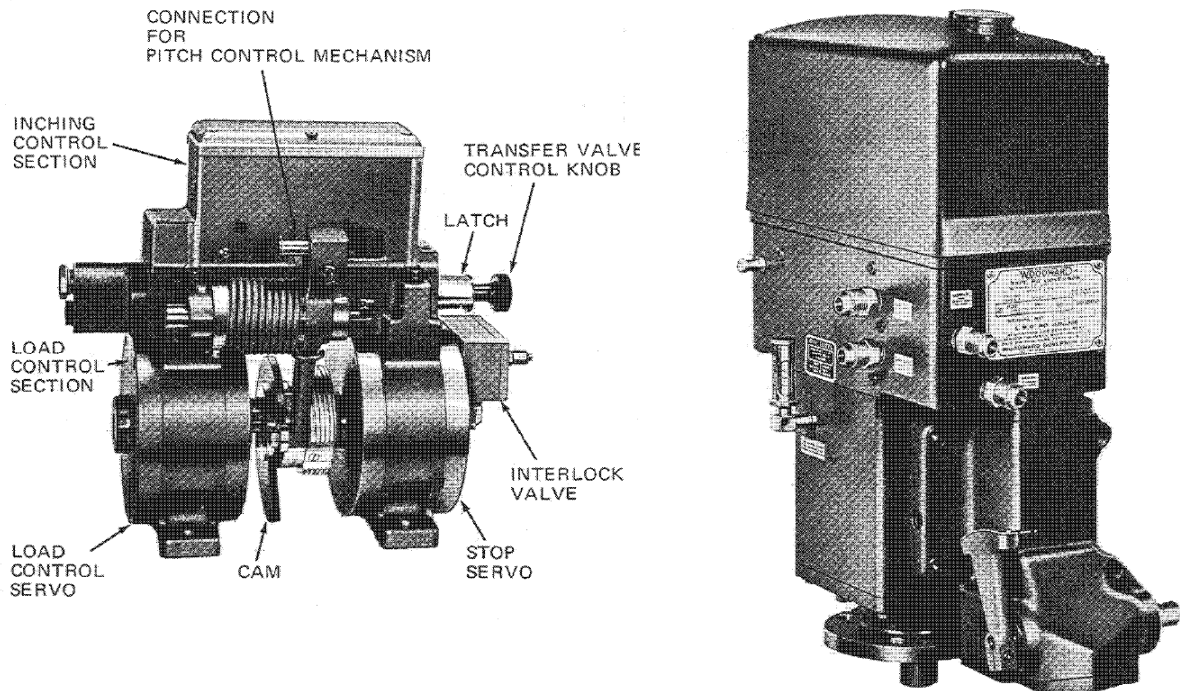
Pitch Control Assembly and Typical PG Governor
